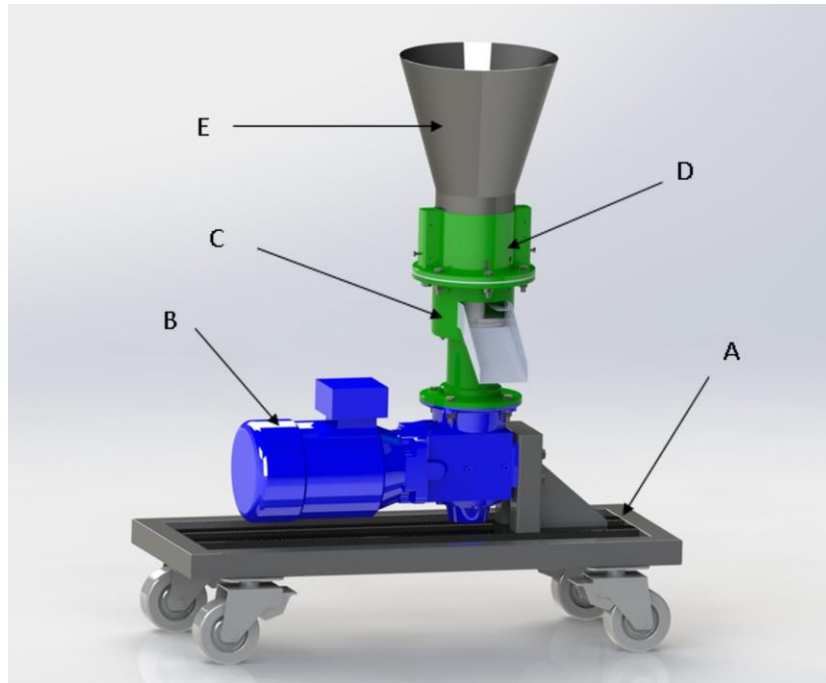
Construction of the developed laboratory pellet press (A – supporting frame of the machine, B – electric gearbox, C – lower working chamber, D – upper working chamber, E – hopper)
